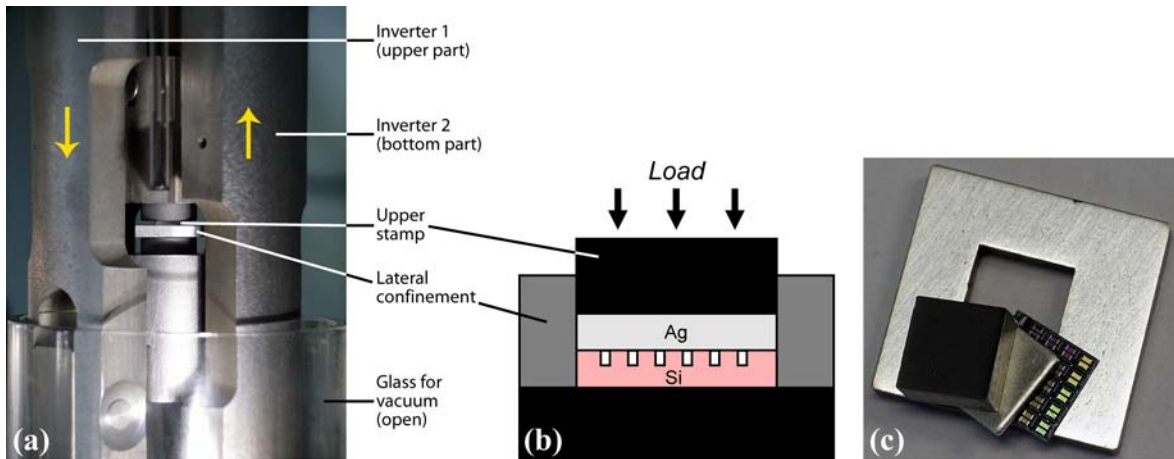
Imprinting setup. (a) Close-up of the high-temperature compression machine. (b) Sketch and (c) picture of the closed-die imprinting system.
